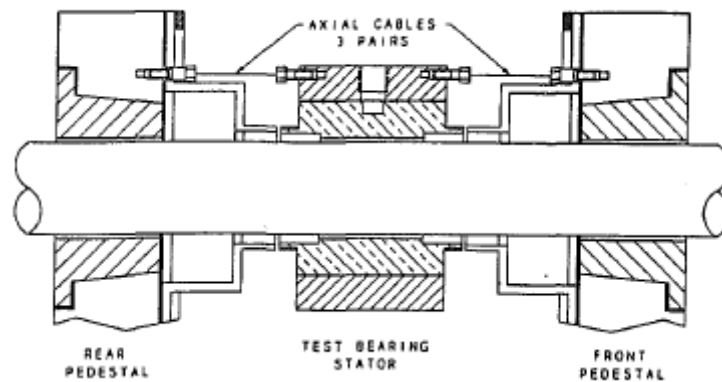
Side view of a test bearing showing axial-tensioning cables. From Childs and Hale [1994].
